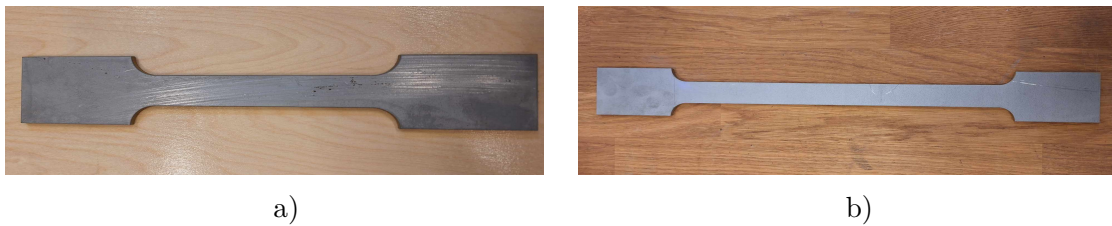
Physical models of test specimens: a) Rod 1 & b) Rod 2.
